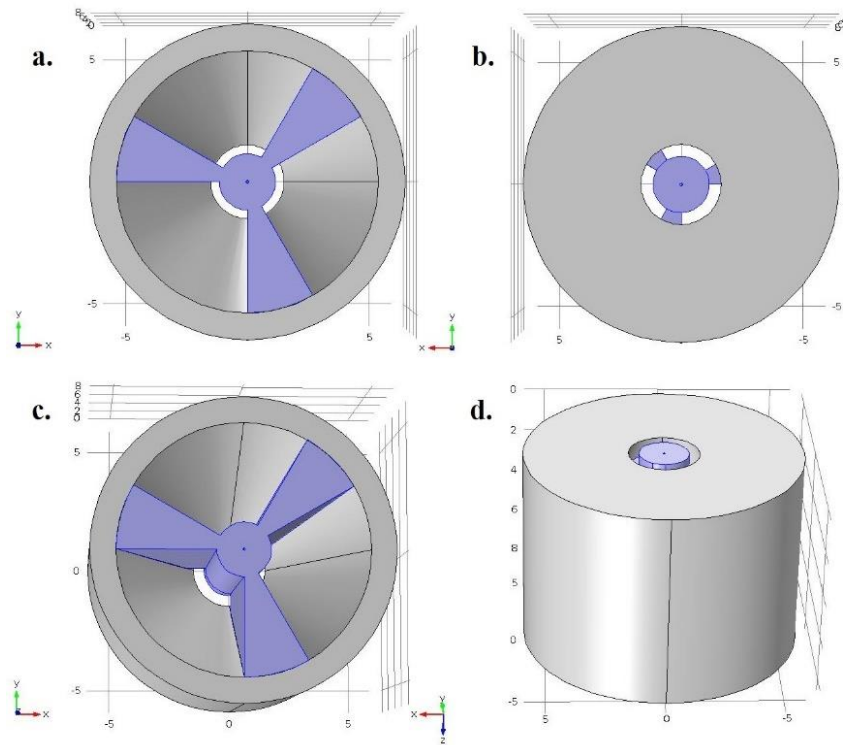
Schematic illustrations of full length spinneret prototype 3 solid views, (a. top view, b. bottom view, c. inclined top view, d. inclined bottom view)
